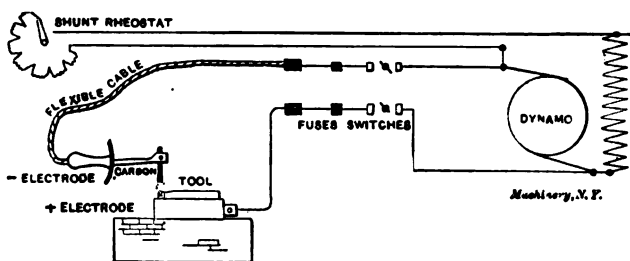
Apparatus for Heating Tools by the Electric Arc.
